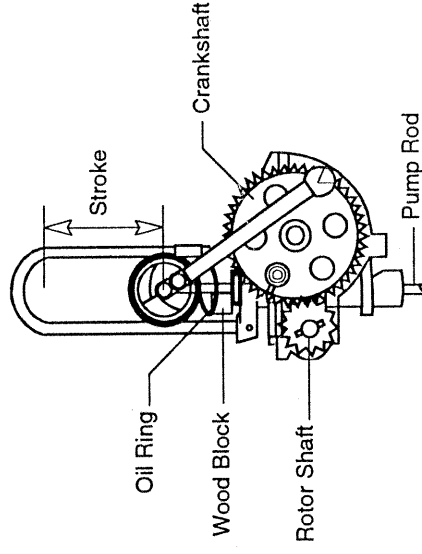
Gear reduction and crank mechanism of a water-pumping windmill.
